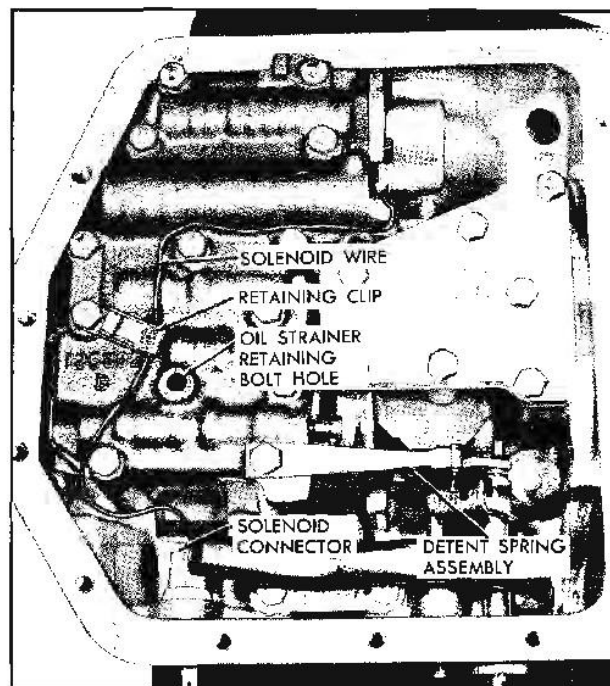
B-50 Transmission - Oil Pan and Strainer Removed
